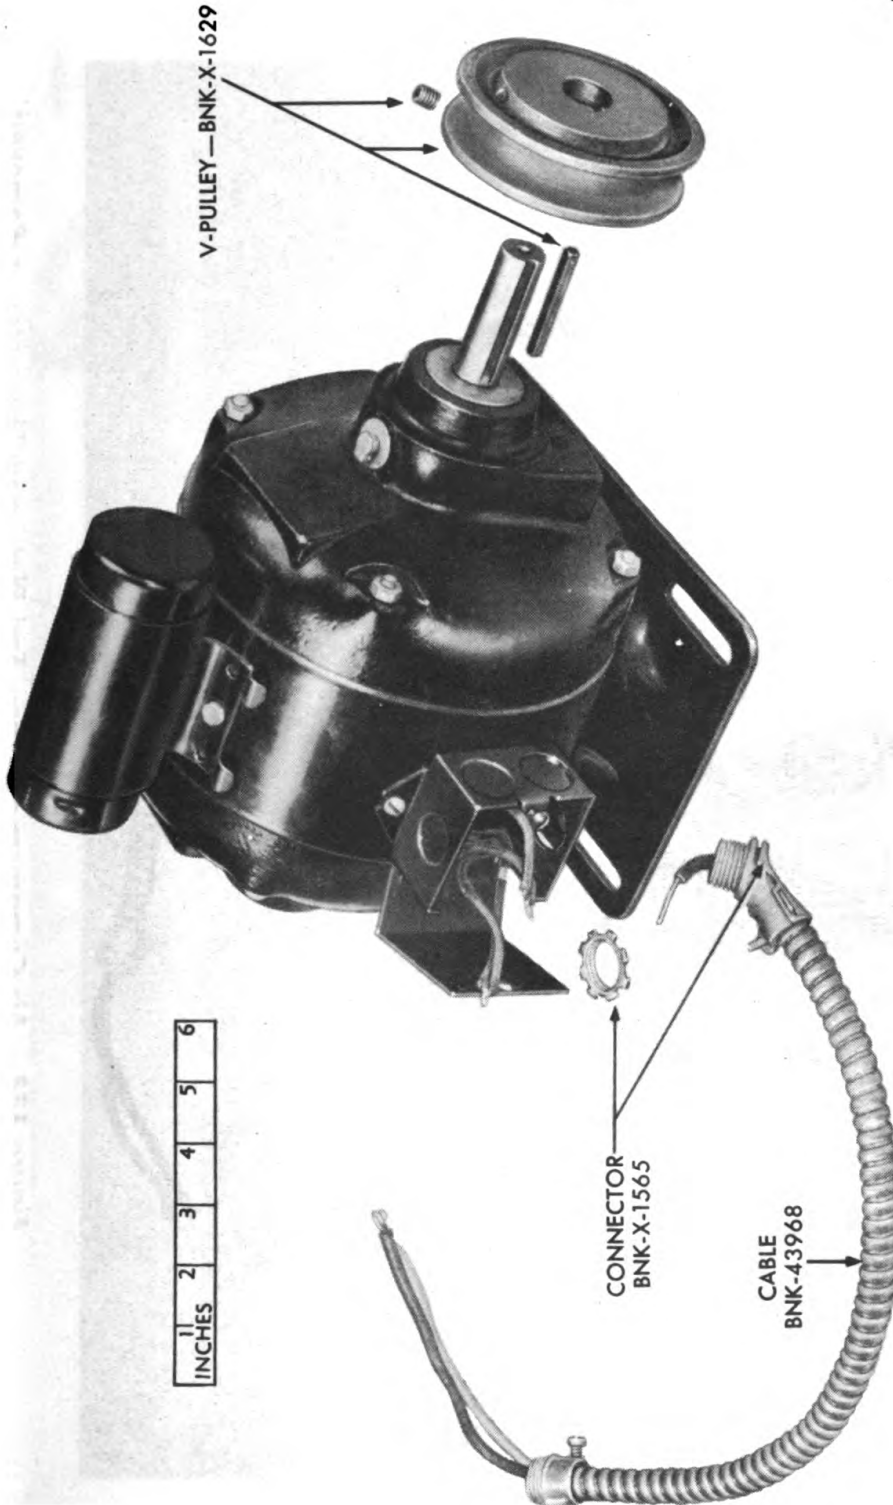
Air Compressor Motor — Pulley and Connecting Wires Removed
